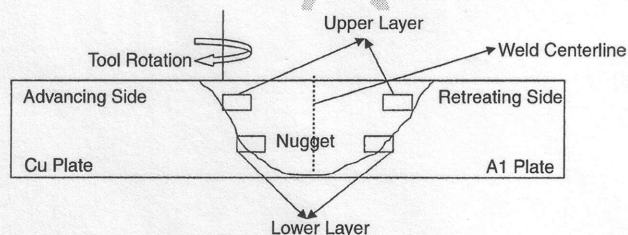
The cross sectional view representation of friction stir welded 6061 aluminum alloy and copper plate showing the positions upper layer, lower layer and the weld nugget.
